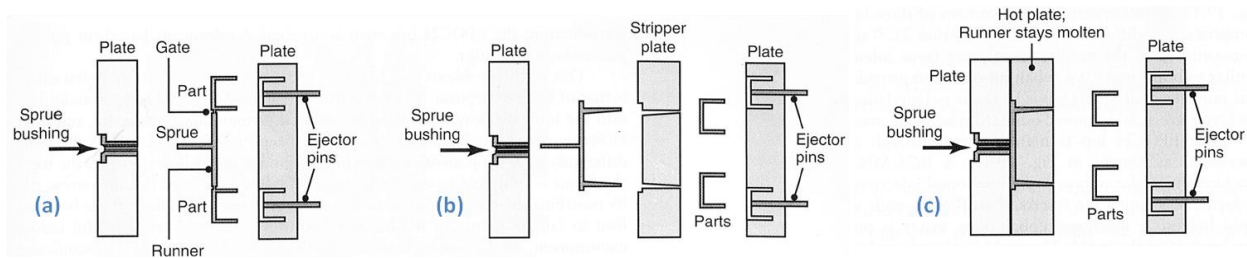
(a) Cold-runner two-plate mold, (b) cold-runner three-plate mold, and (c) hot-runner mold.
